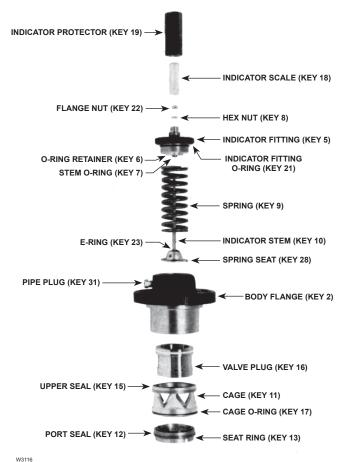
Exploded View of Full-Capacity Trim Package Assembly
